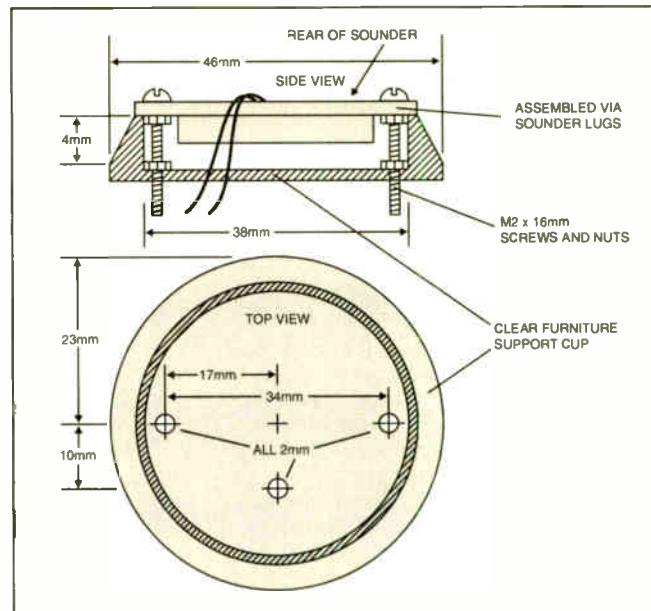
Suggested method of mounting the piezo sounder on the outside of the case.
